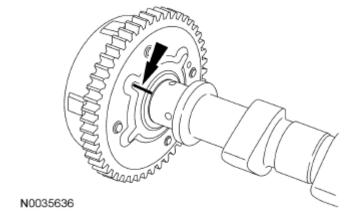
Identifying Sprocket And Camshaft Reference Mark Courtesy of FORD MOTOR CO.
